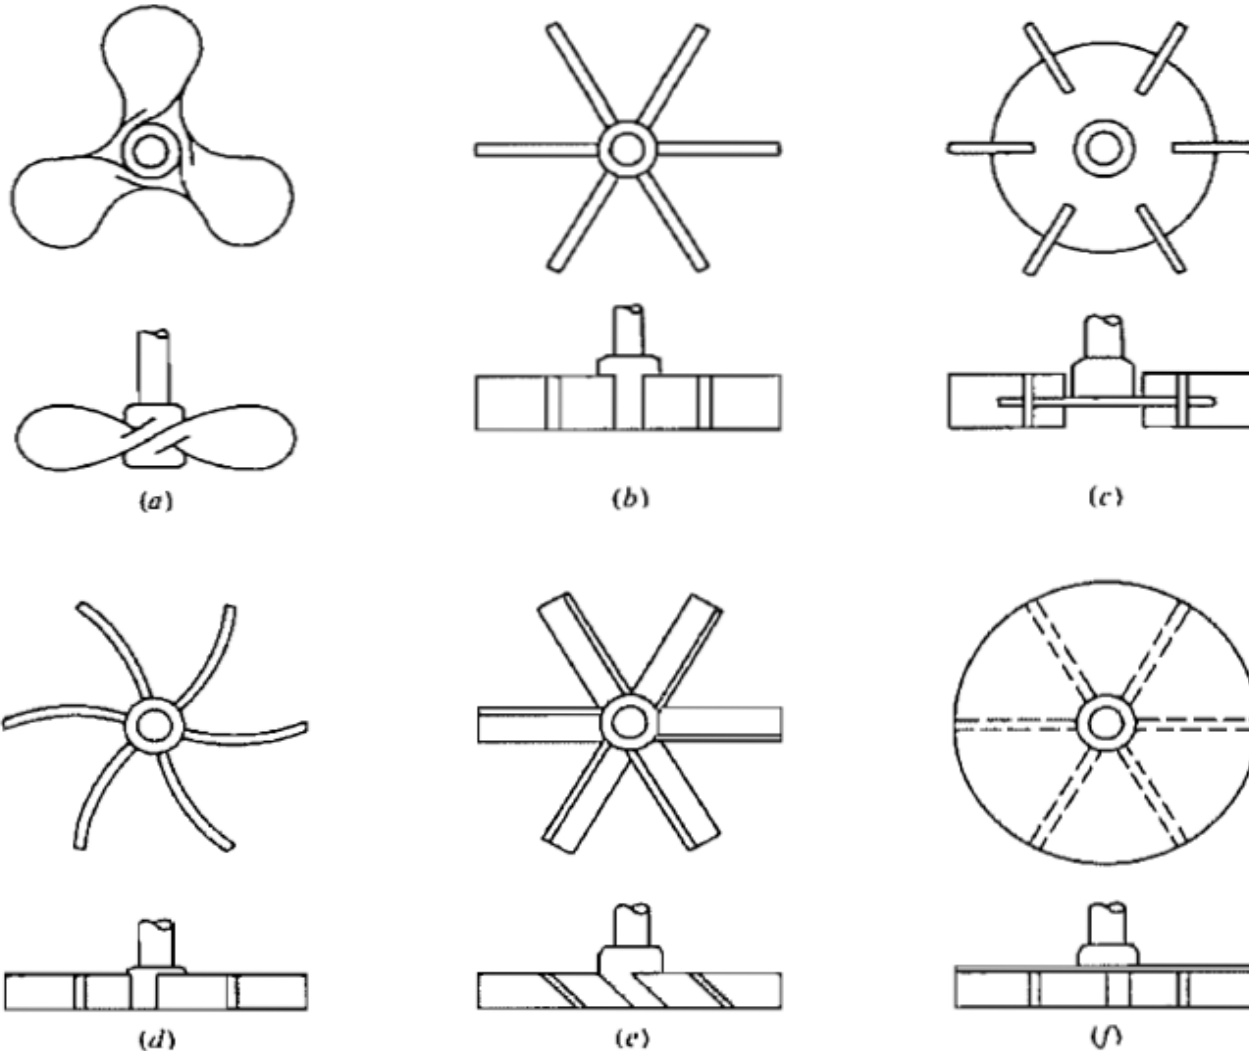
Impellers, with typical proportions: (a) marine-type propellers; (b) flat-blade turbine, $w = d_i/5$, (c) disk flat-blade turbine, $w = d_i/5$, $d_d = 2d_i/3$, $B = d_i/4$; (d) curved-blade turbine, $w = d_i/8$; (e) pitched-blade turbine, $w = d_i/8$; and (f) shrouded turbine, $w = d_i/8$.
